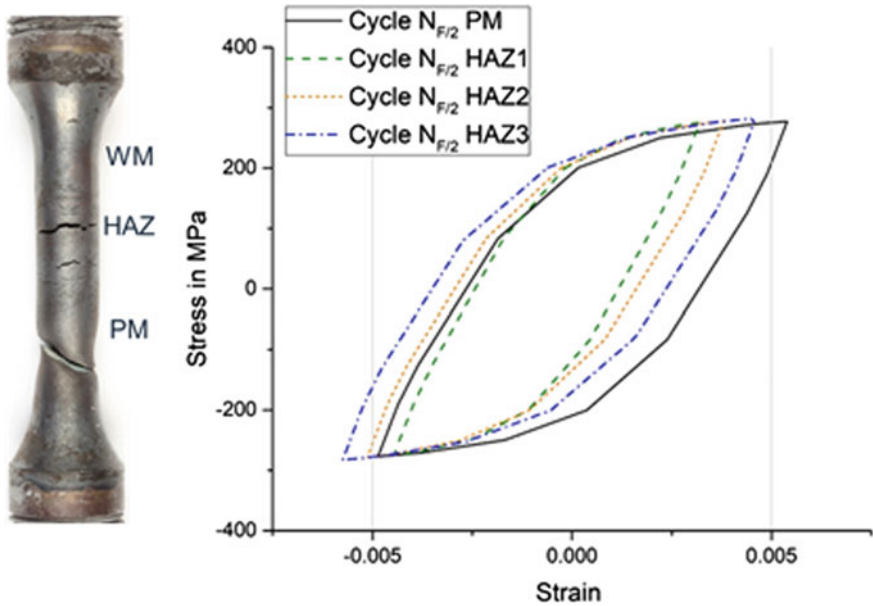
Local hysteresis loops CLCF test, damage pattern of specimen
